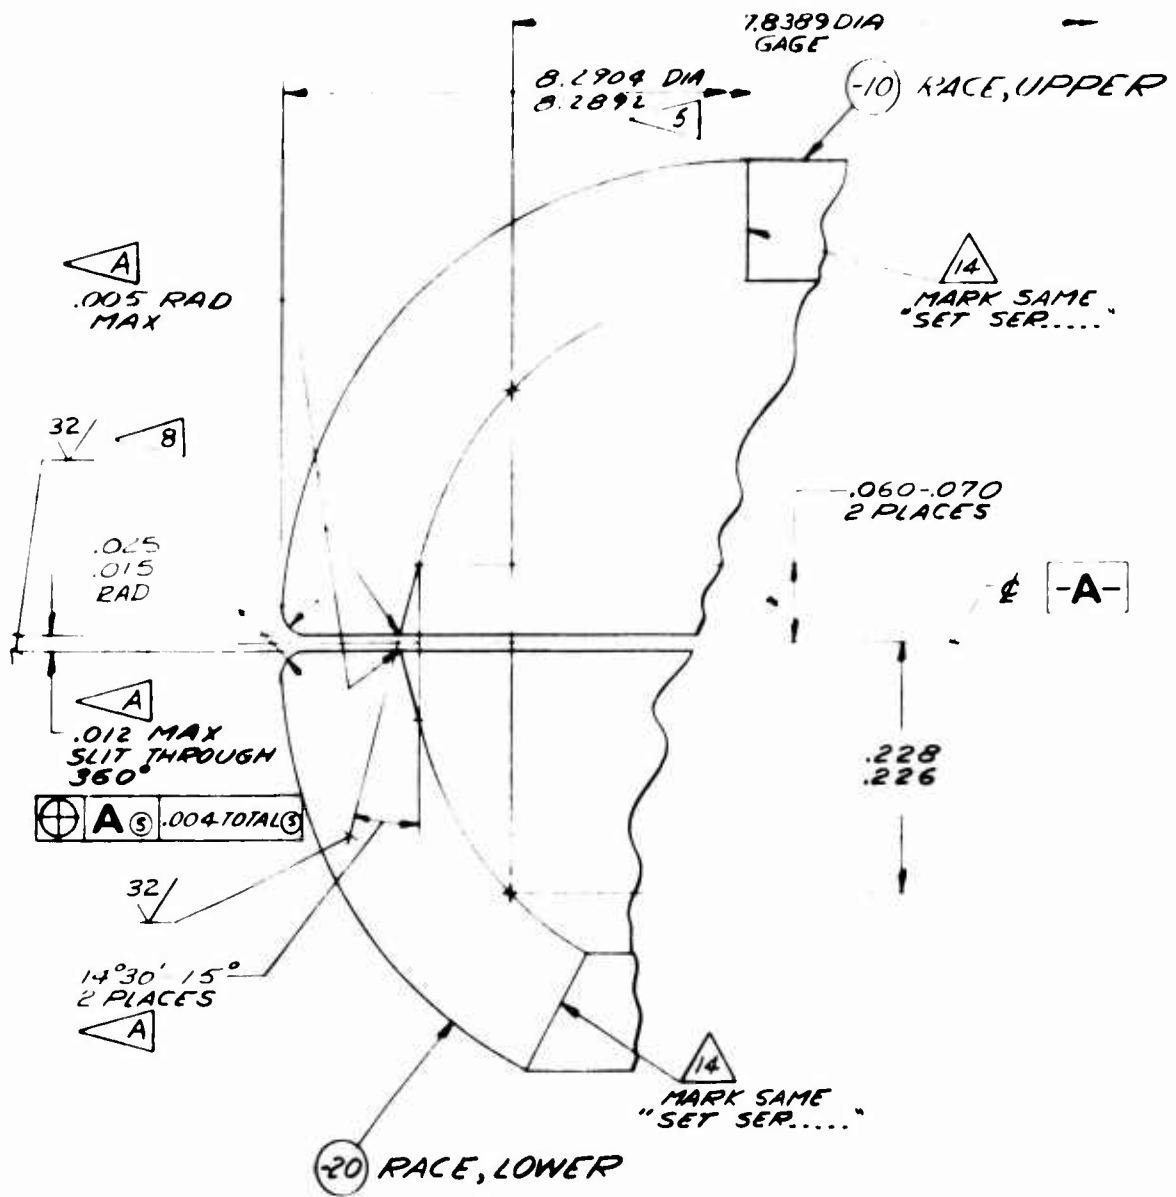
OUTER-RACE INSERT REWORK DRAWING
